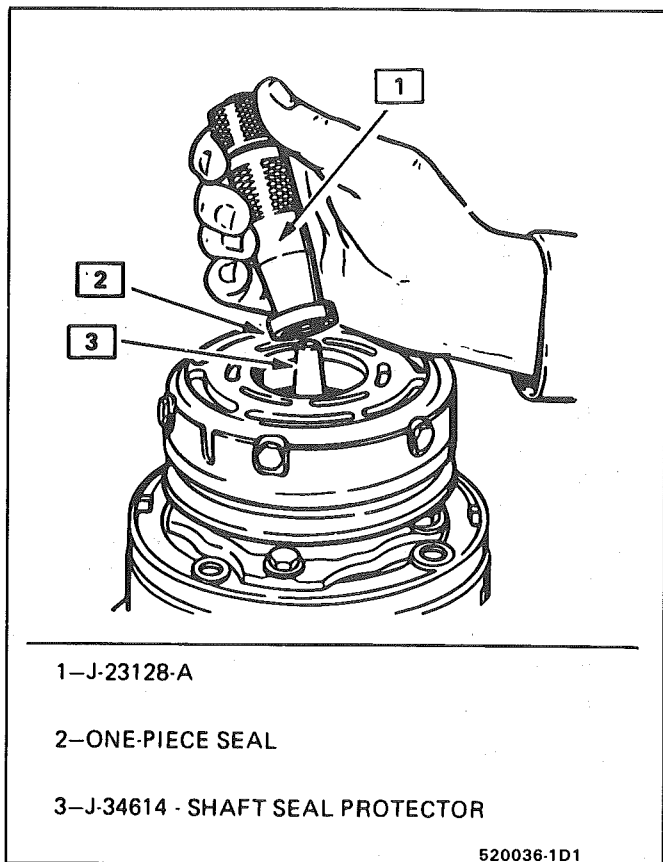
Removing & Installing One Piece Seal (Off Car)
